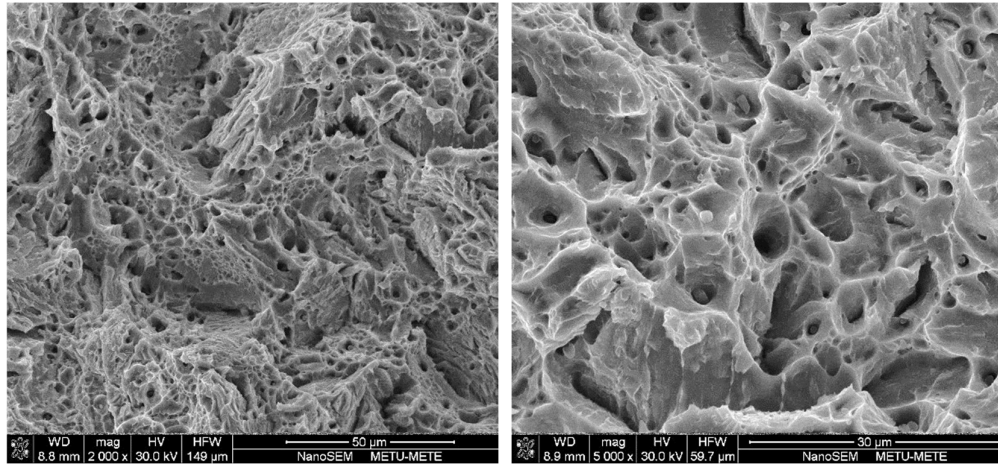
Fracture surface of normalized tensile test specimen
